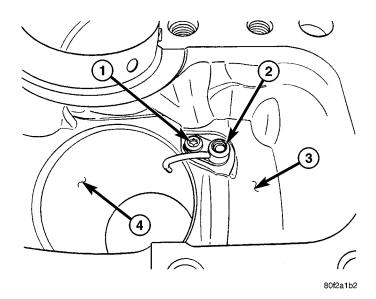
Oil Jet Fastener - 2.4L Turbo
